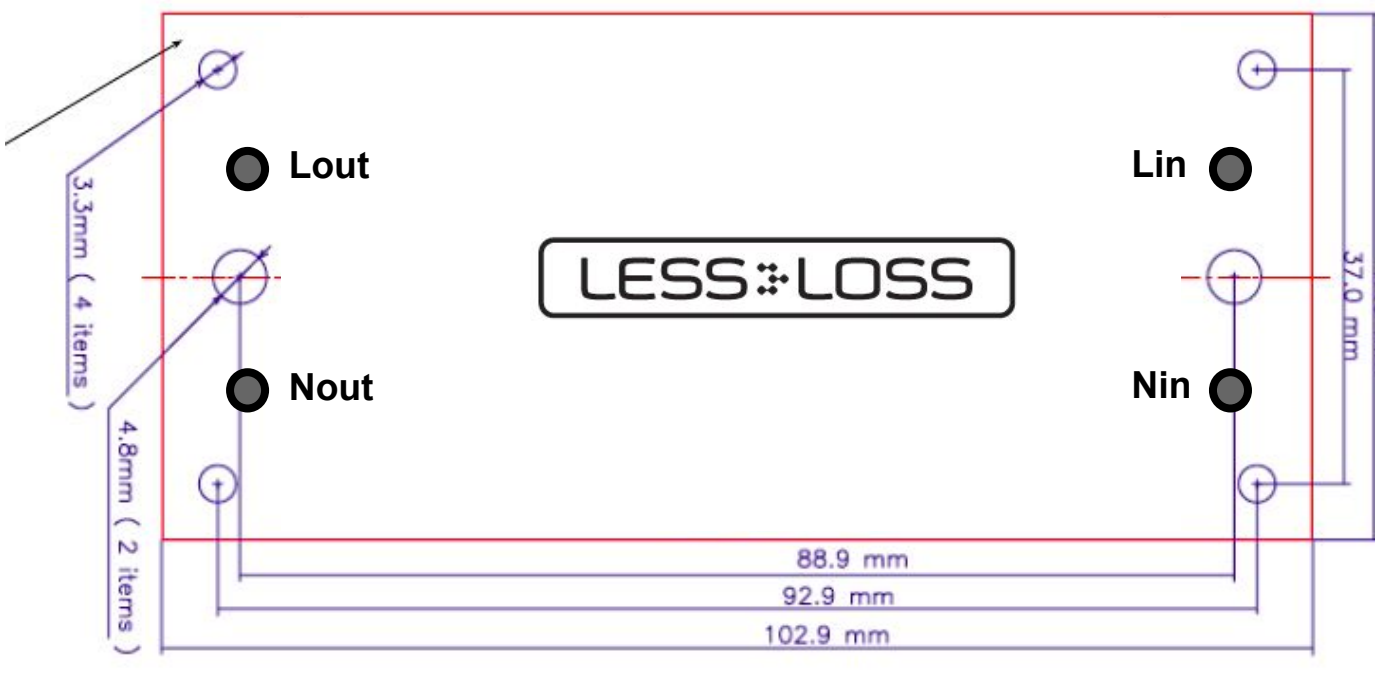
Dimensions and mounting hole location of a single Firewall board.
